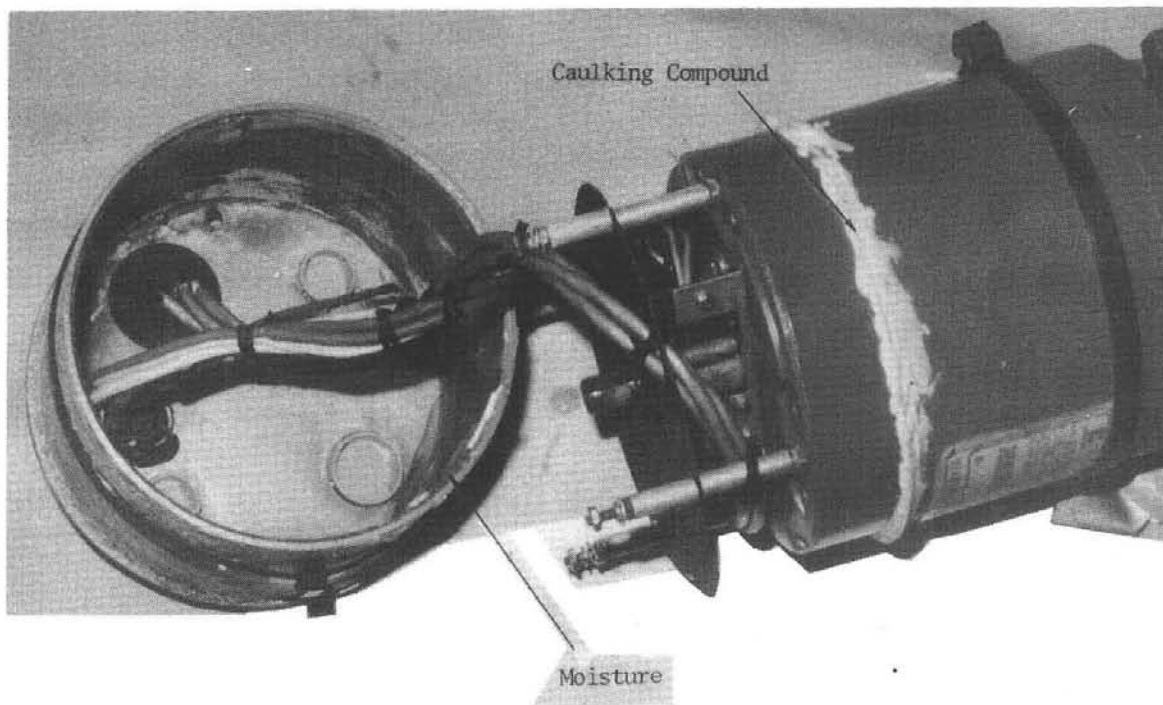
MDAC Azimuth Drive Motor with End Bell Removed
